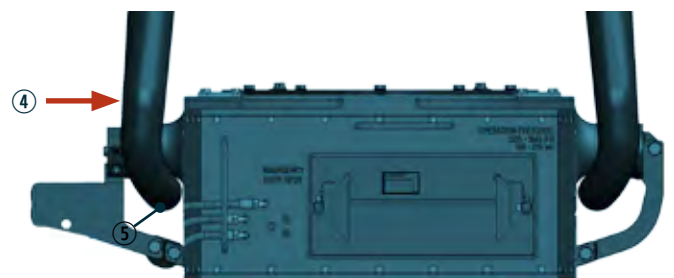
Installation of the elevator Rotator adapter to the VES SD
